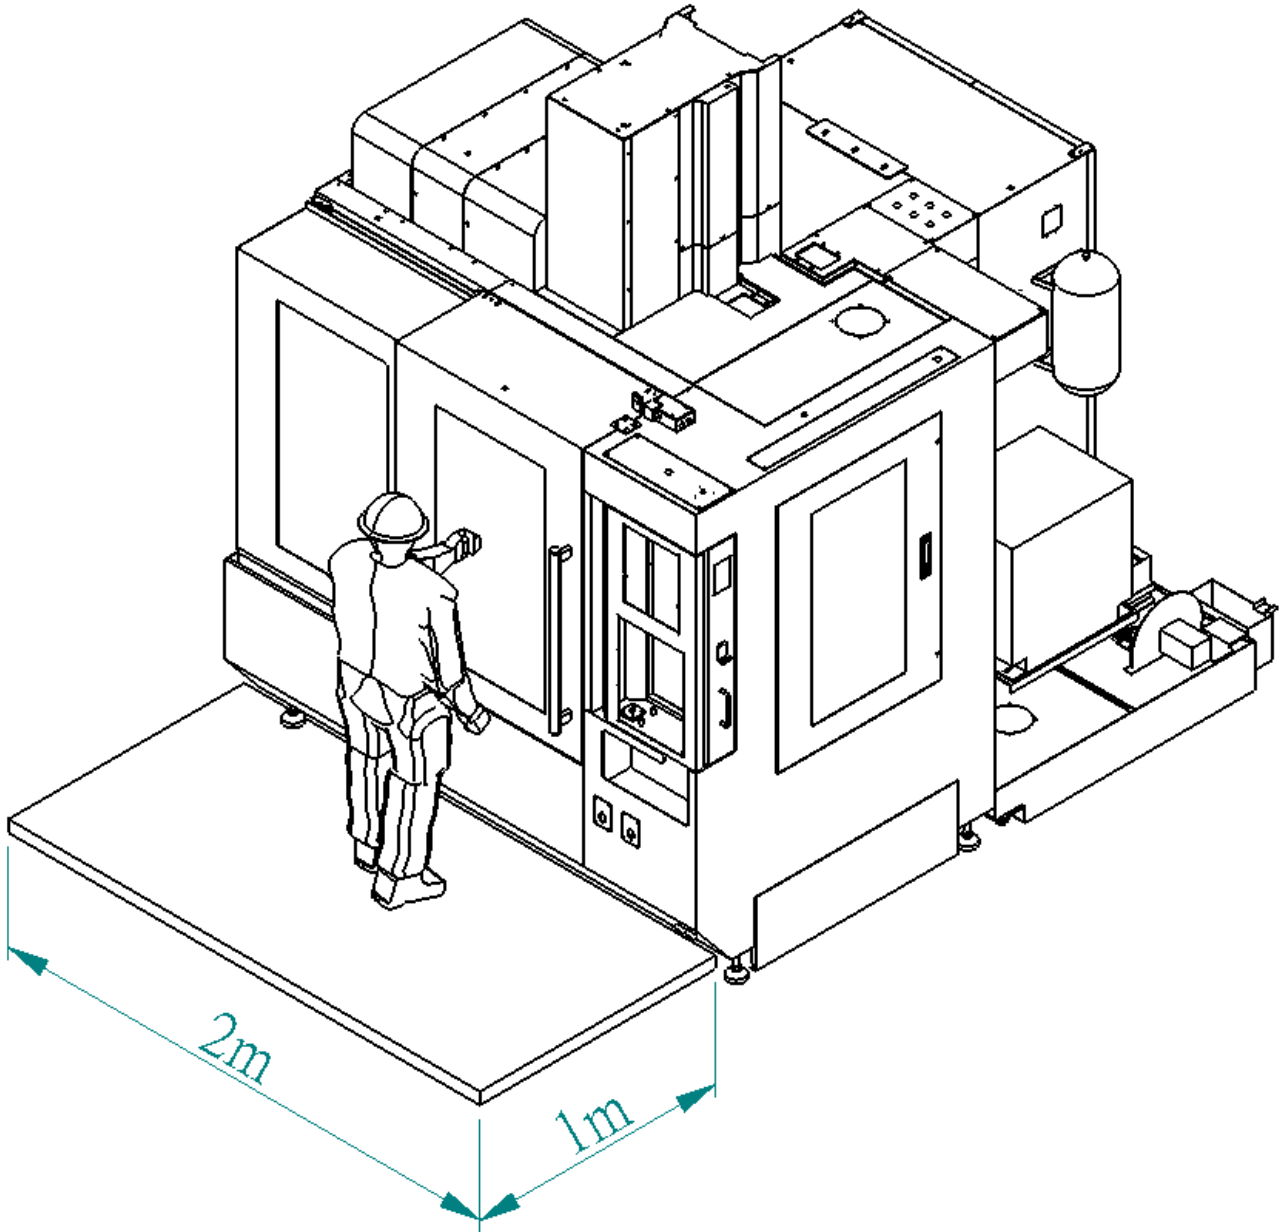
OPERATOR POSITION VIEW OF MACHINE
